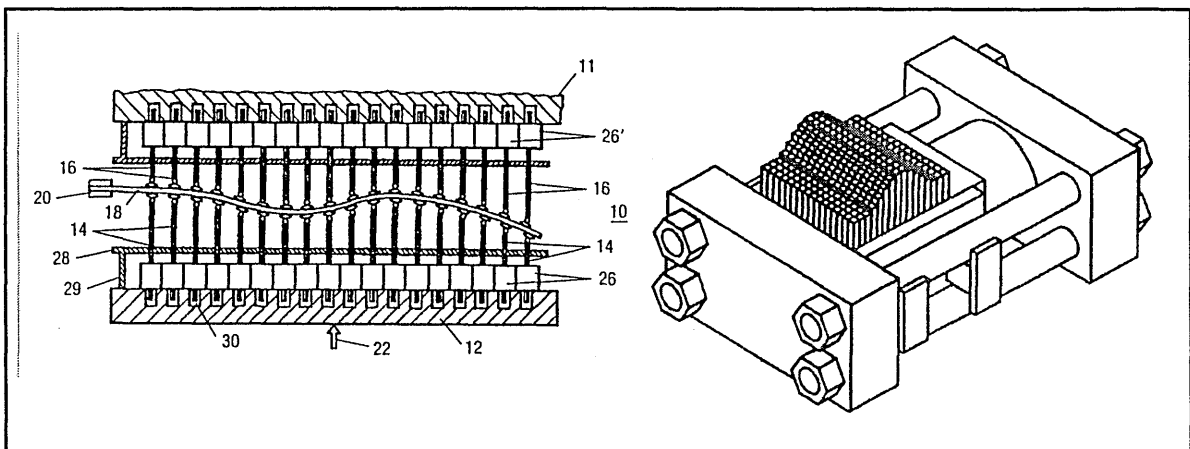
Multi-pin Reconfigurable Tooling
